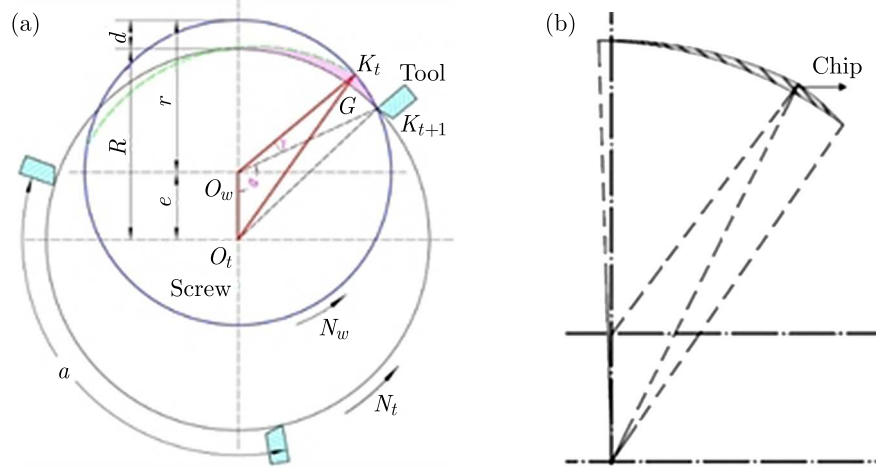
Simplified geometry model of (a) cutting principle and (b) chip of whirlwind milling
